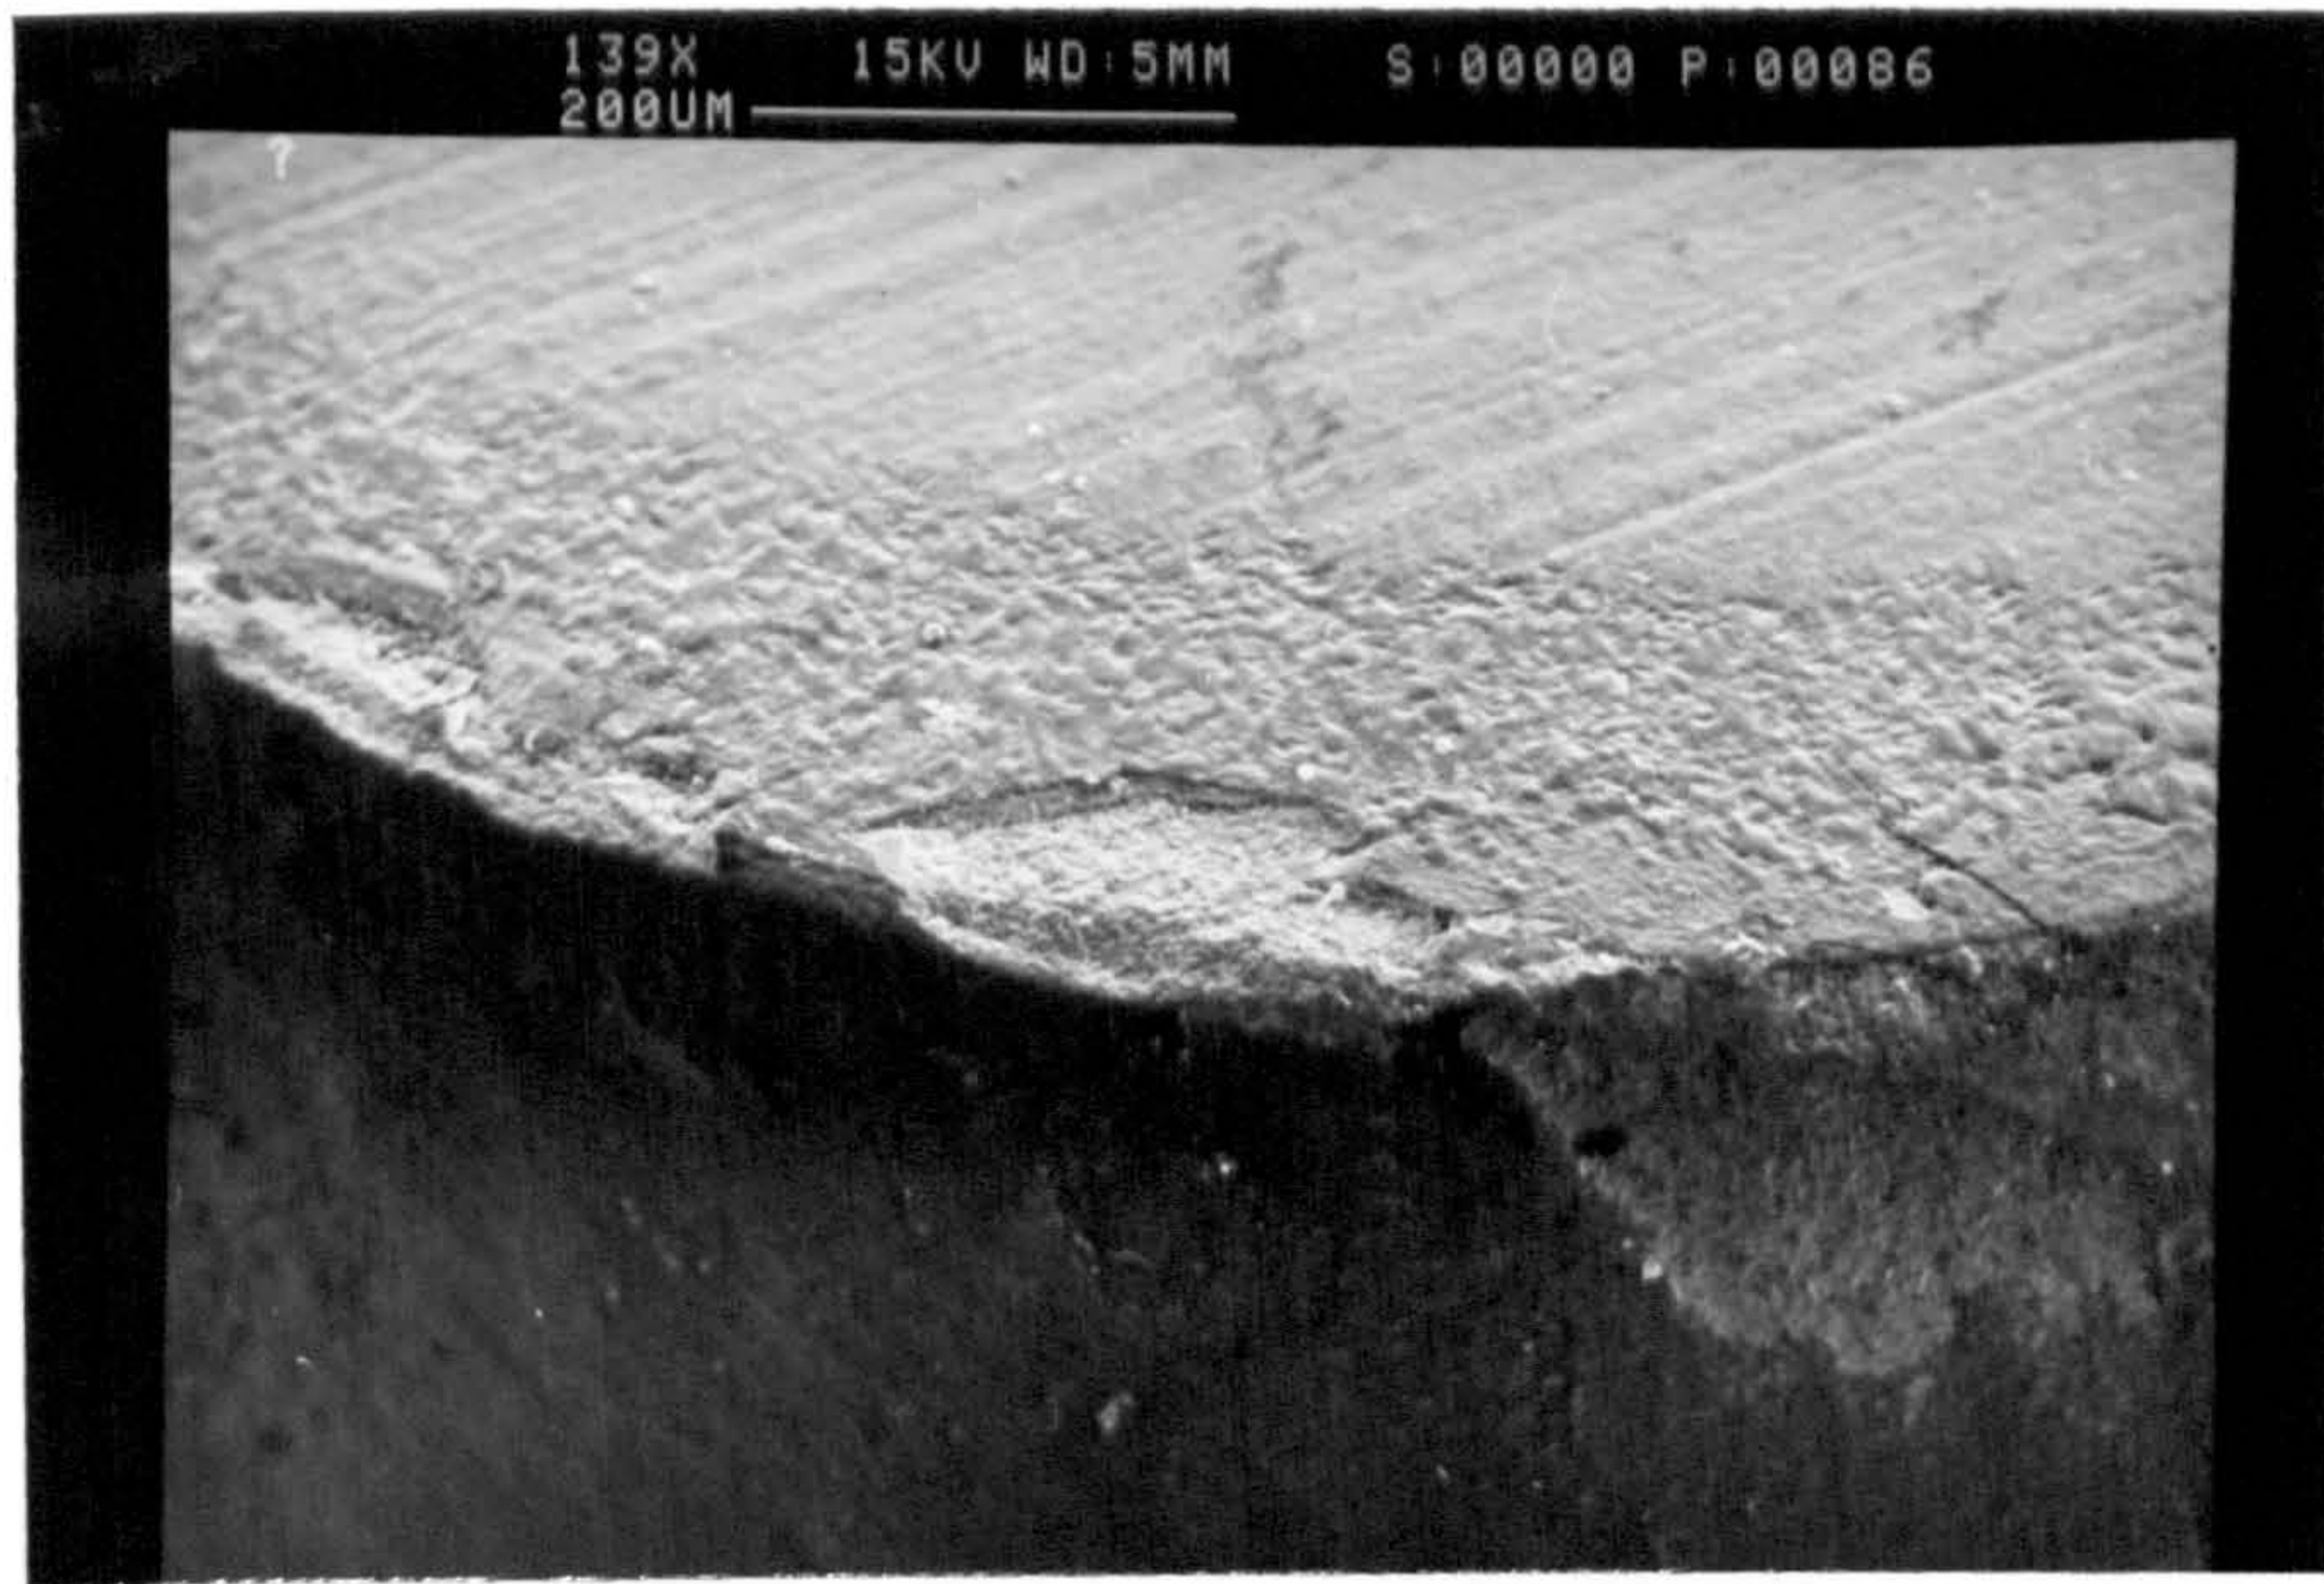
Nose area of a worn triple-coated carbide tool showing the flaking of the coating. (Speed = 400 m/min, feed = 0.25 mm/rev, cutting time = 5 min)
